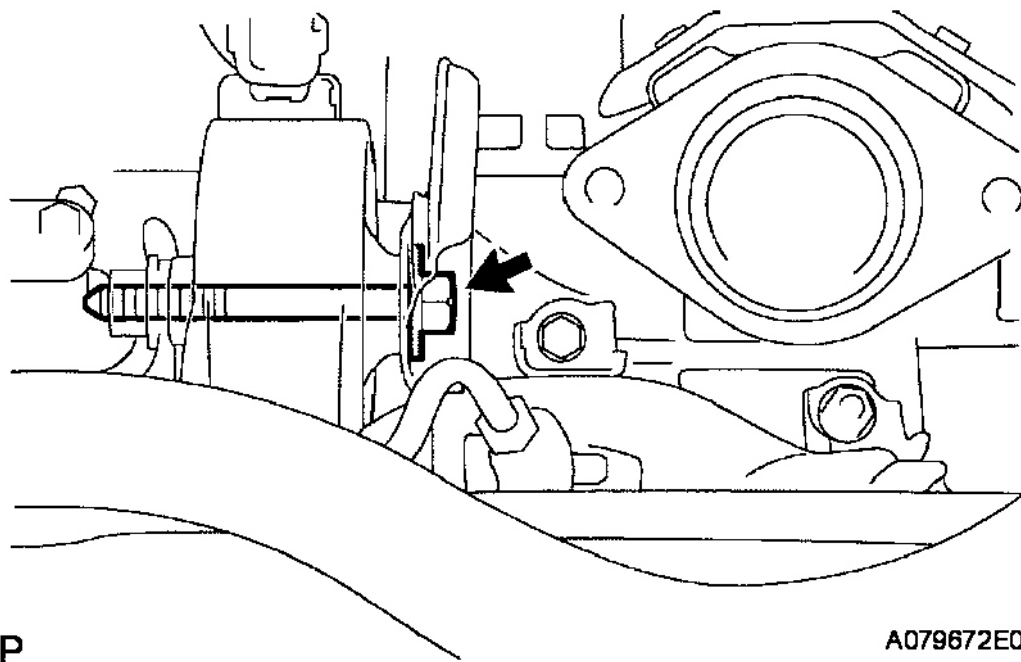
Fastening Bolt To Secure Engine And Transaxle Assembly To Suspension Crossmember
